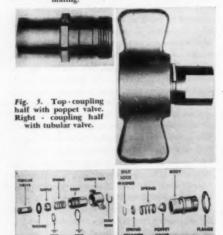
Left-Exploded view of coupling half with poppet valve. Right-Exploded view of coupling half with tubular valve.
